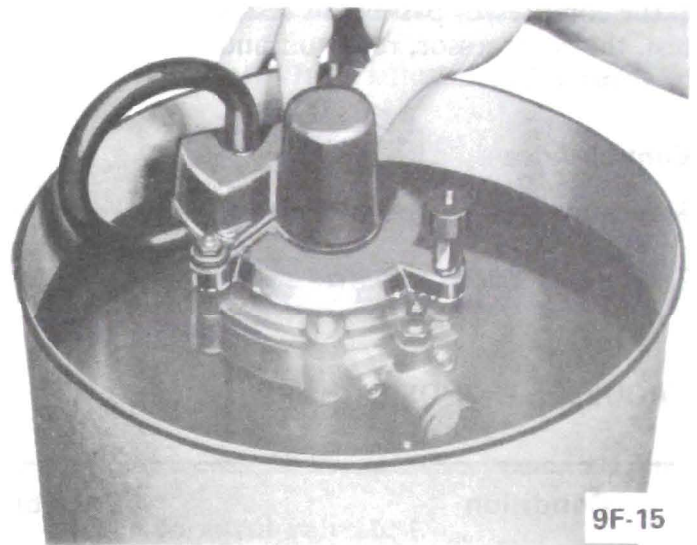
F-2 - Checking Compressor, Reservoir Tank and Regulator for Leaks
